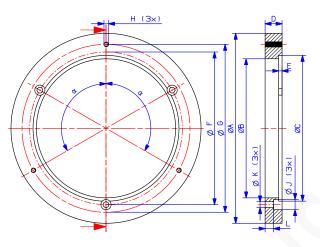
TUTF-PHJ85d-*x*—Holder mount
